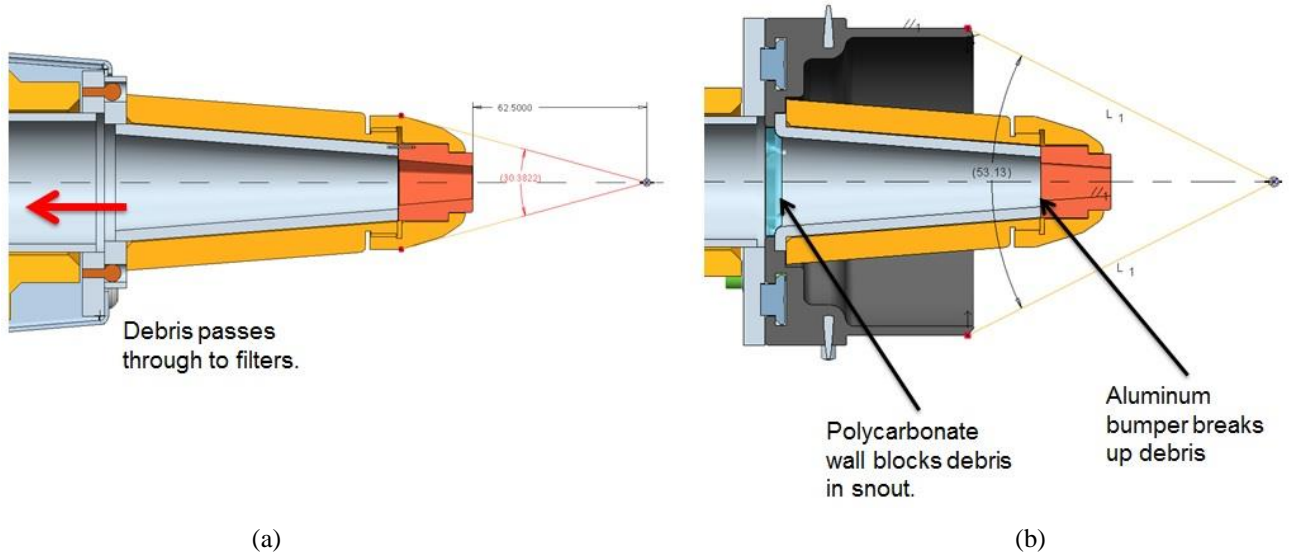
(a) Current HEIDI nose cone design shields a 30° angle and allows debris to pass through to the filter assembly. (b) The upgraded HEIDI-C will shield a 53° angle and block target debris from traveling aft of the nose cone assembly.
